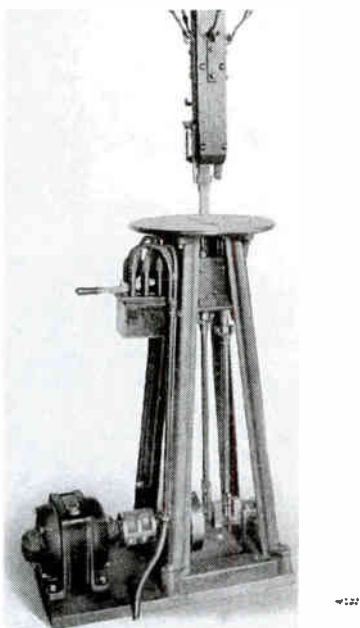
3 H.P. Induction Motor Direct Connected to Driving Shaft of Jig Saw
